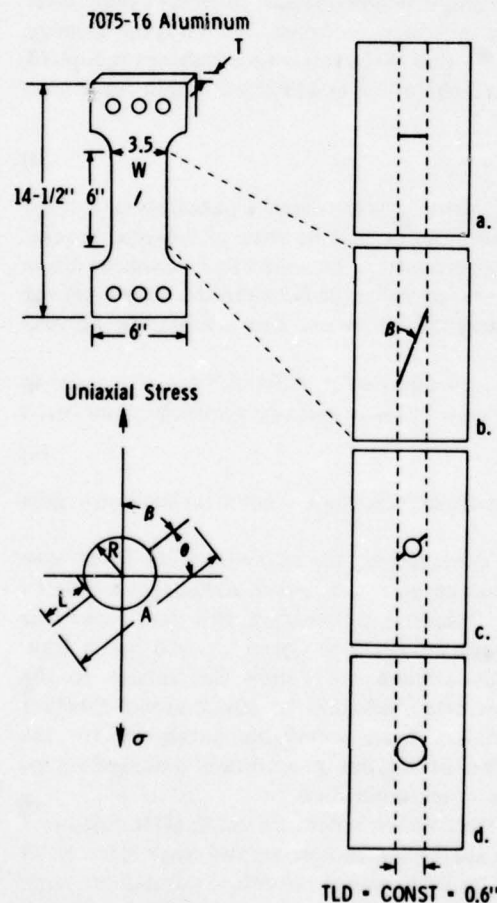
Specimen configurations for machined, controlled damage specimens.
